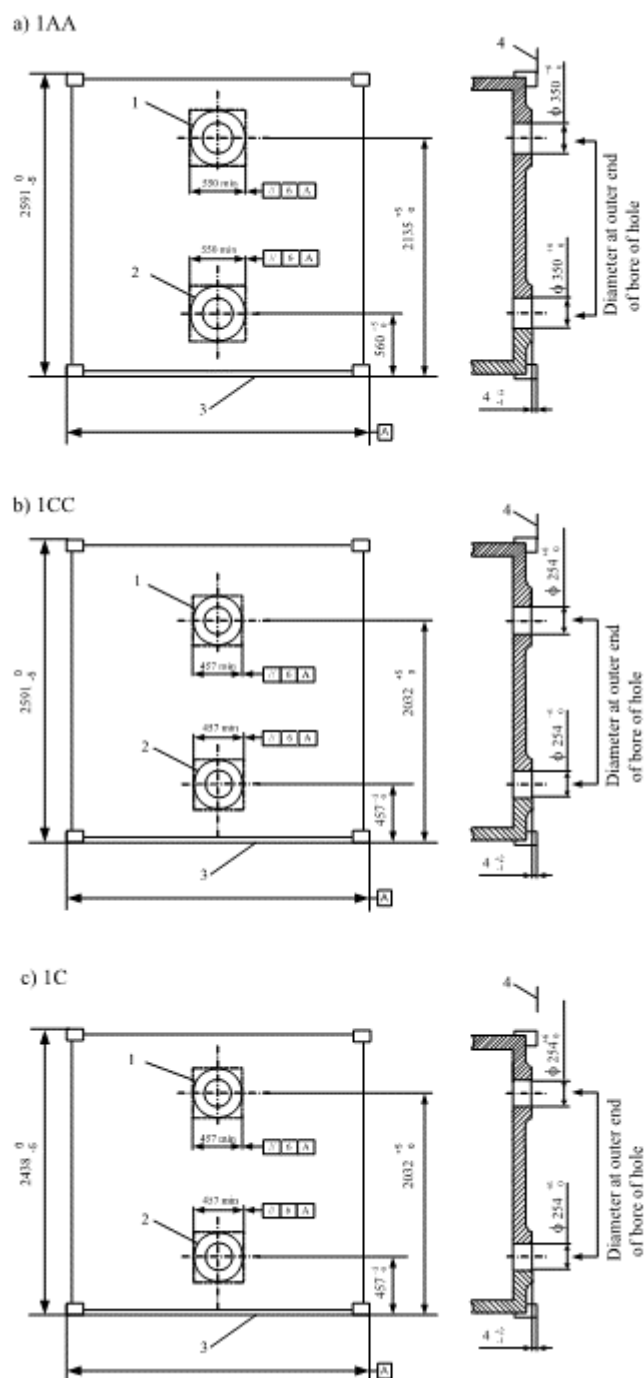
Ventilation openings in the end wall of 1AA, 1CC and 1C containers
